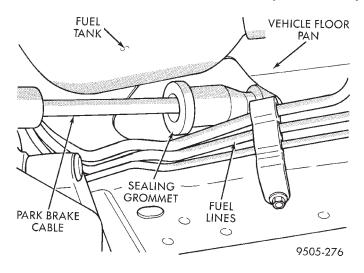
Park Brake Cable Removal / Installation At Floor Pan
